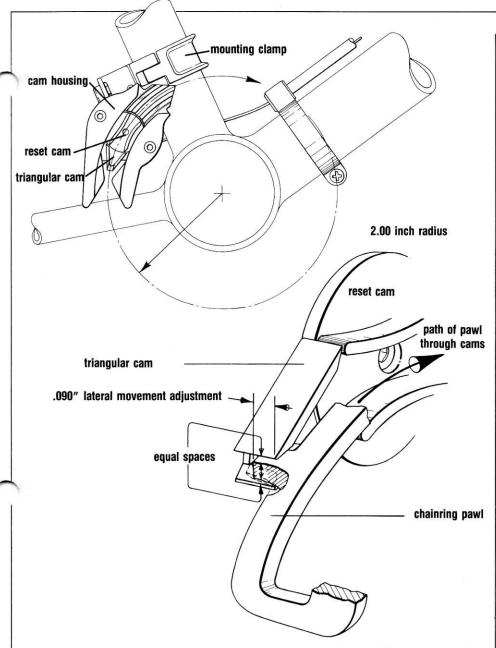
Selector assembly in position on seat tube (upper drawing). Triangular cam and reset cam control the path of the pawl. Lower drawing shows critical alignment between pawl and cams.
